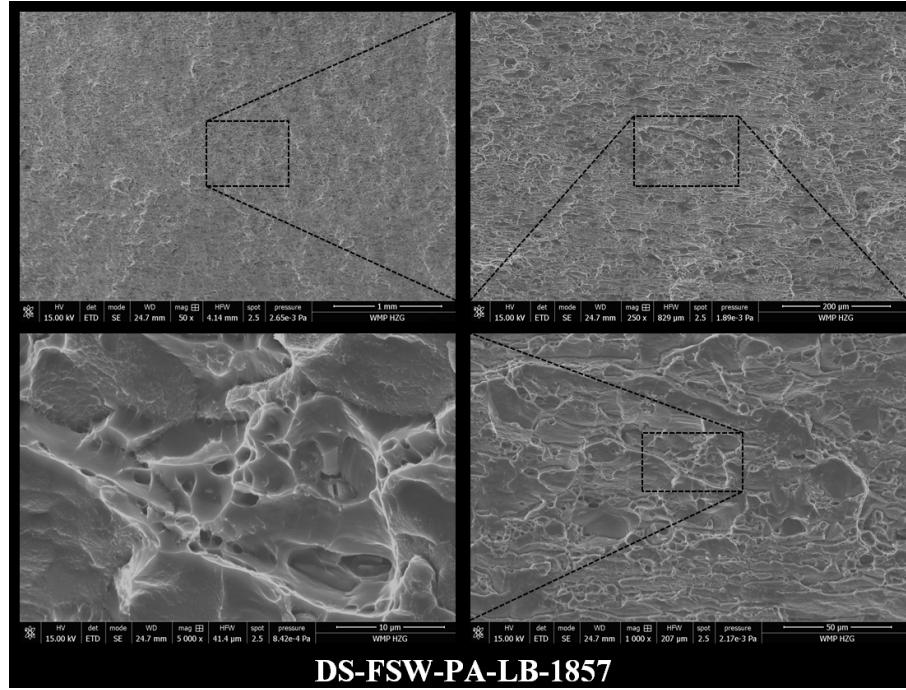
SEM fractographs of the DS-FSW-PA-LB-1857 fracture surface.
